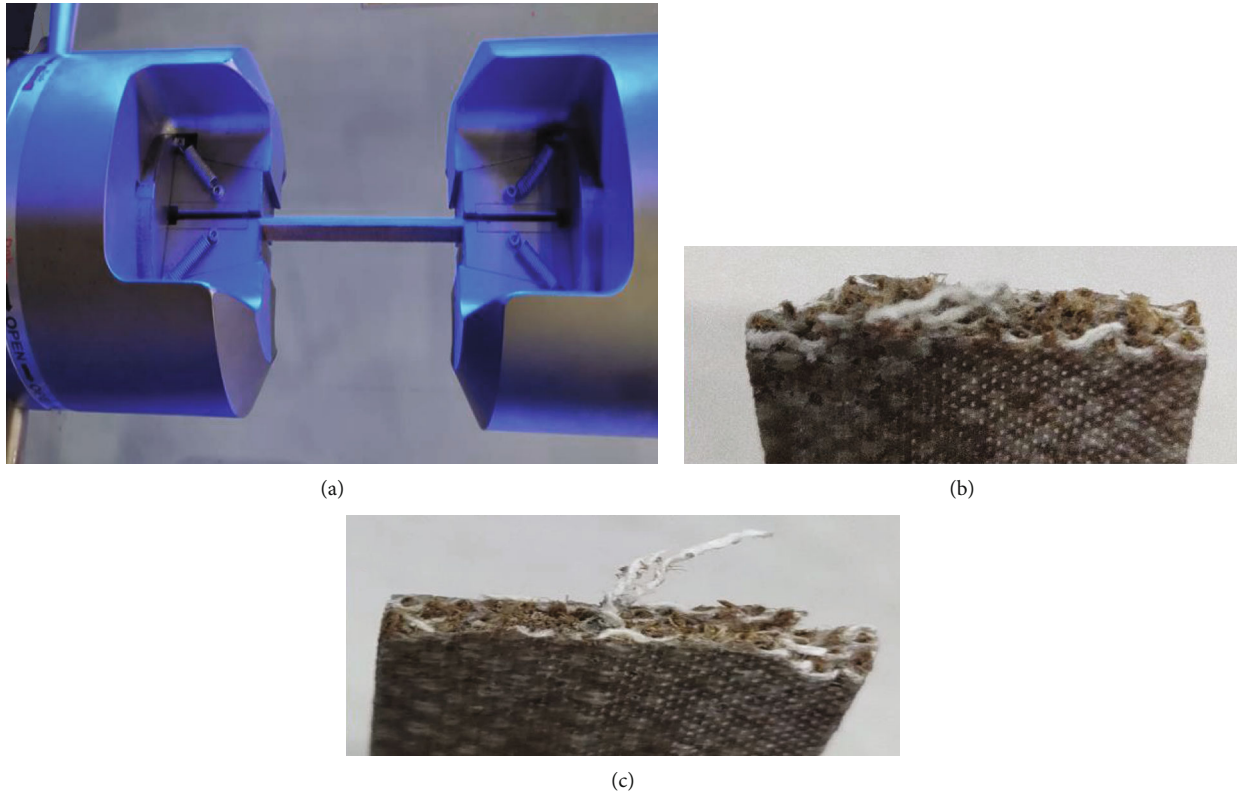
(a) Tensile testing setup with specimen. (b) Tensile fractured. (c) Flexural fractured surface.
